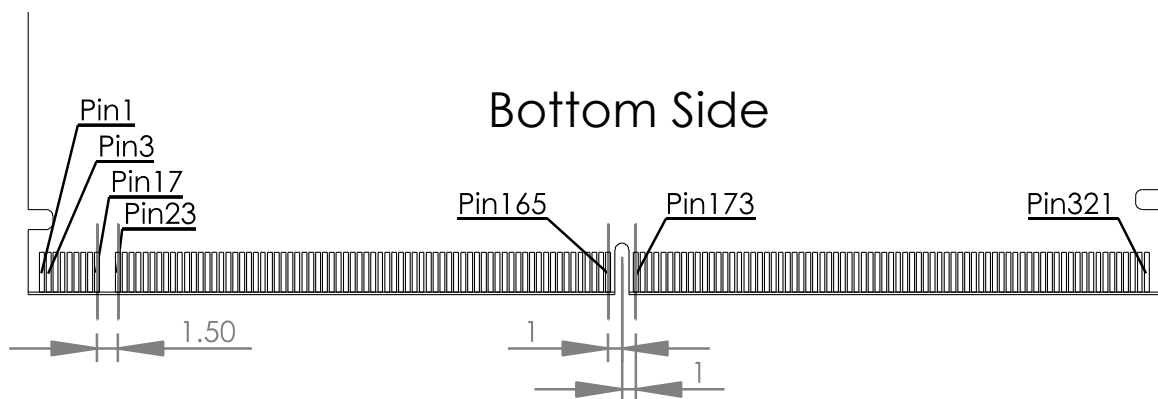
Pin numbering schema on the bottom side of the module (bottom view)
